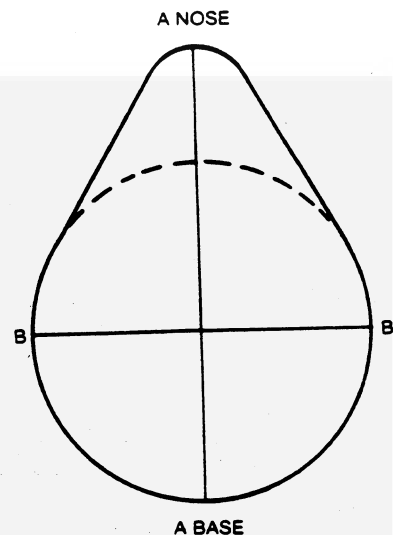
CAMSHAFT LOBE MEASUREMENT
